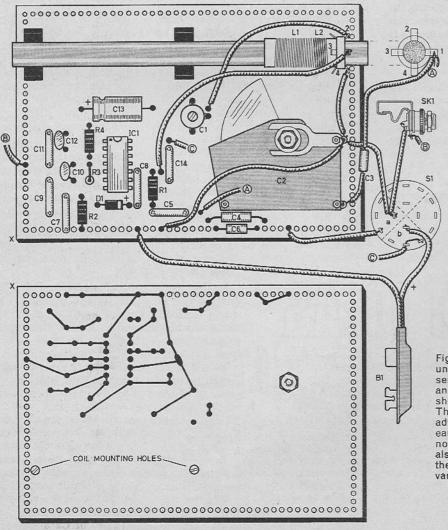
Wiring details for the unit. Remember that ICI is sensitive to damage by static, and as such precautions should be taken against this. The use of an i.c. socket is advised. Remember to use an earthed soldering iron and try not to touch the pins. Insure also that any wires do not foul the moving vanes of the variable capacitor. bolt the component panel to the front of the case. Some washers should be placed over the mounting bush between the component panel and the case to act as spacers. Otherwise the component panel could easily be damaged as the mounting nut of C2 is tightened.
